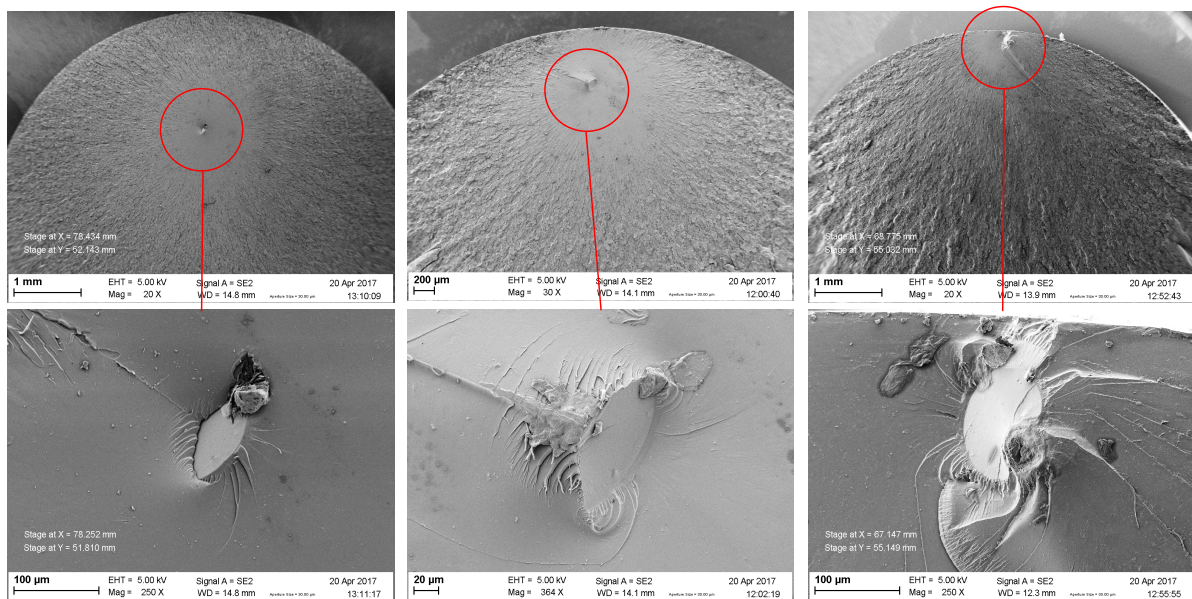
Fracture surfaces of the specimens broken under cycling loading at 60% of the stress at failure with a zoom on the initiation of the fracture. From left to right: sample 1 fatigue, sample 2 fatigue and sample 3 fatigue.
